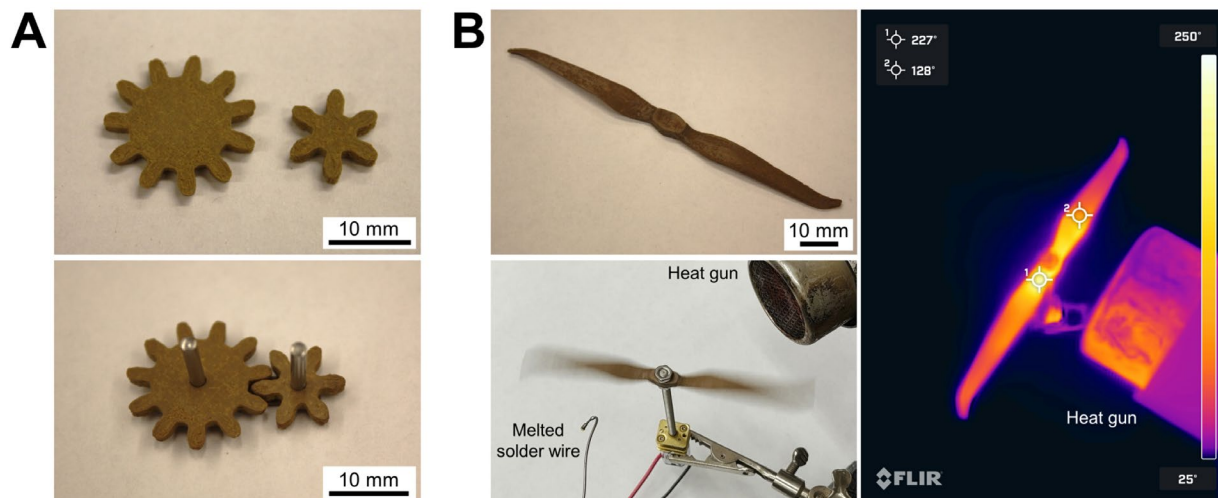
A) A printed all-aramid gear set. B) A printed all-aramid propeller that can be used in a high-temperature environment.
